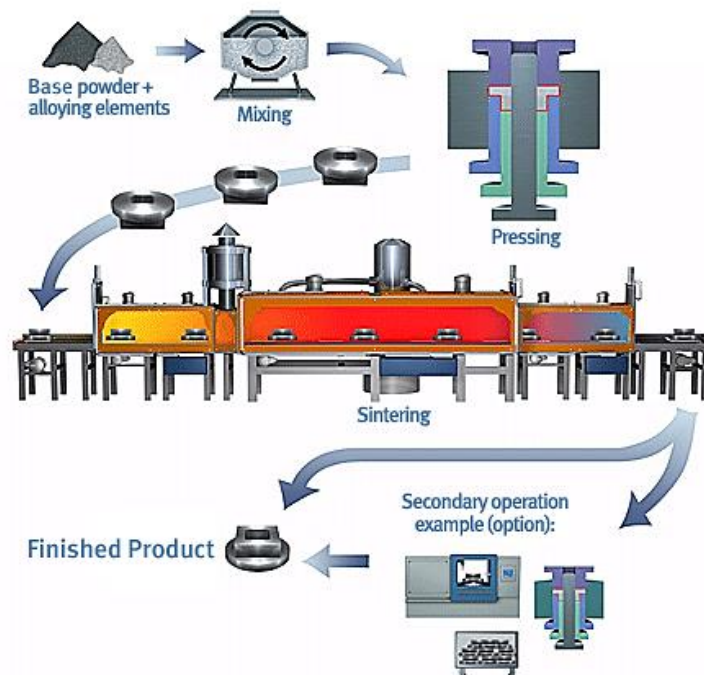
Schematic sintering process for a stainless steel workpiece.
